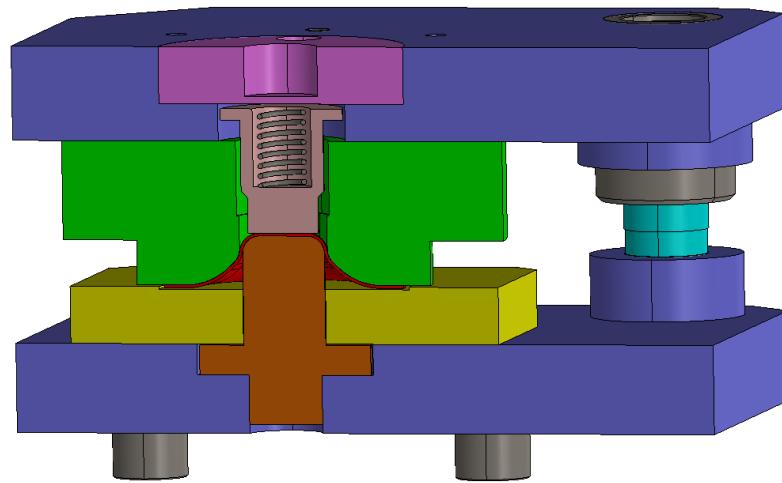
Main section of the forming die assembly, including the final component (in red) [3]
